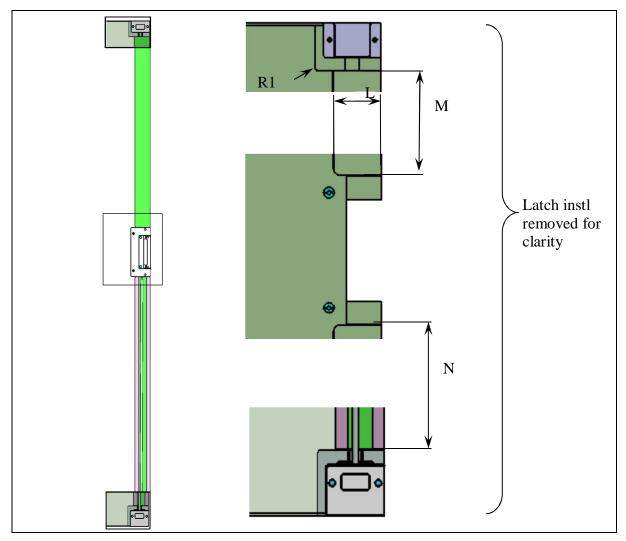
TWO-POINT LATCH CUTOUT, ROD - VIEW FROM TOP OR BOTTOM PANEL EDGE
